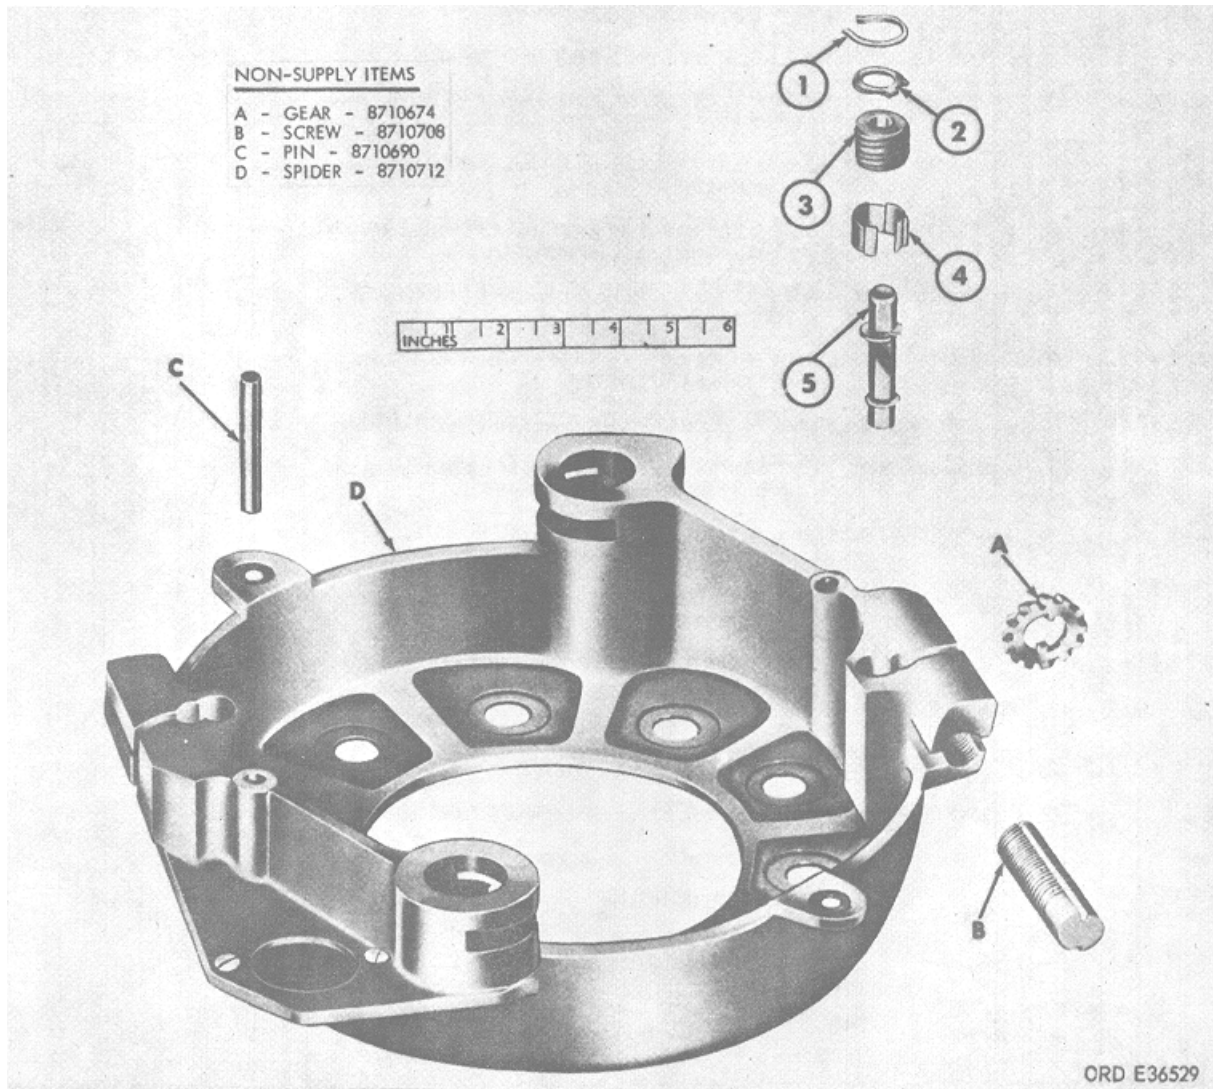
BRAKE SPIDER WITH GEAR ASSEMBLY
